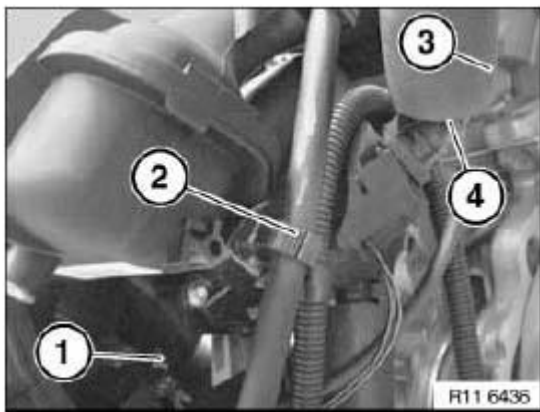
Identifying Plug Connection, Crankcase Breathers And Holders
